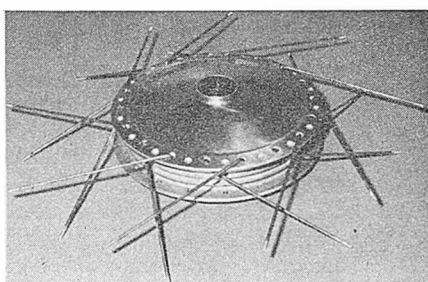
Place inner and outer spokes in one side of rim and then invert wheel and install remaining spokes.
